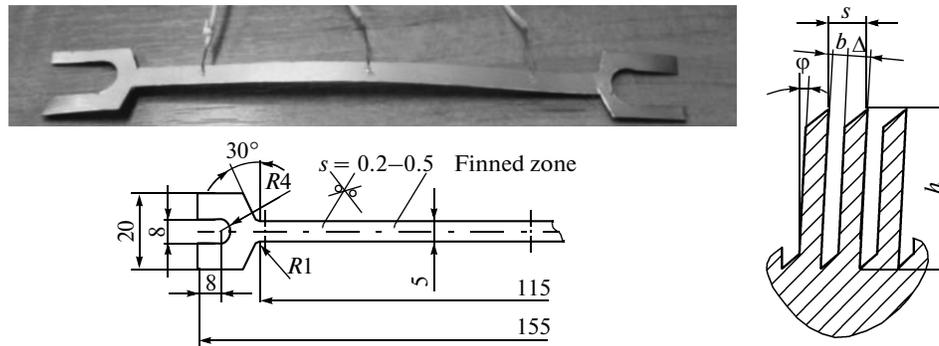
Geometric shape of the sample, location of the finned zone and thermocouples, and the sizes of fins.
